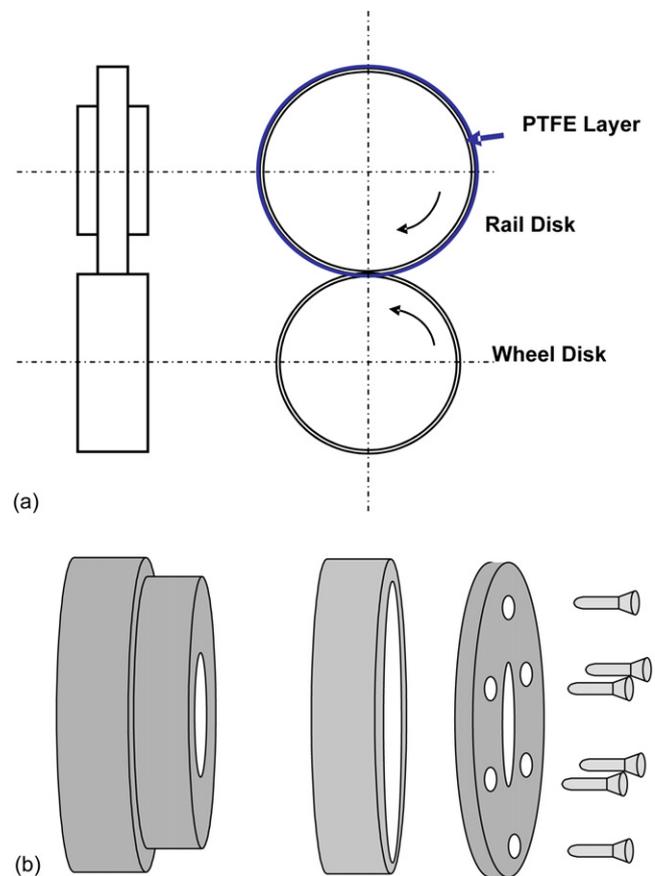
(a) A disk-on-disk Amsler test machine with two cylindrical disk assemblies running against each other and (b) various parts making up the disk assembly.
